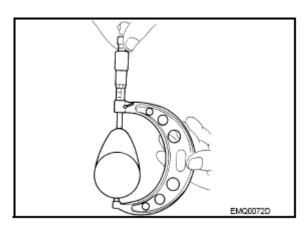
Measuring Camshaft Cam Height Courtesy of NISSAN NORTH AMERICA, INC.
